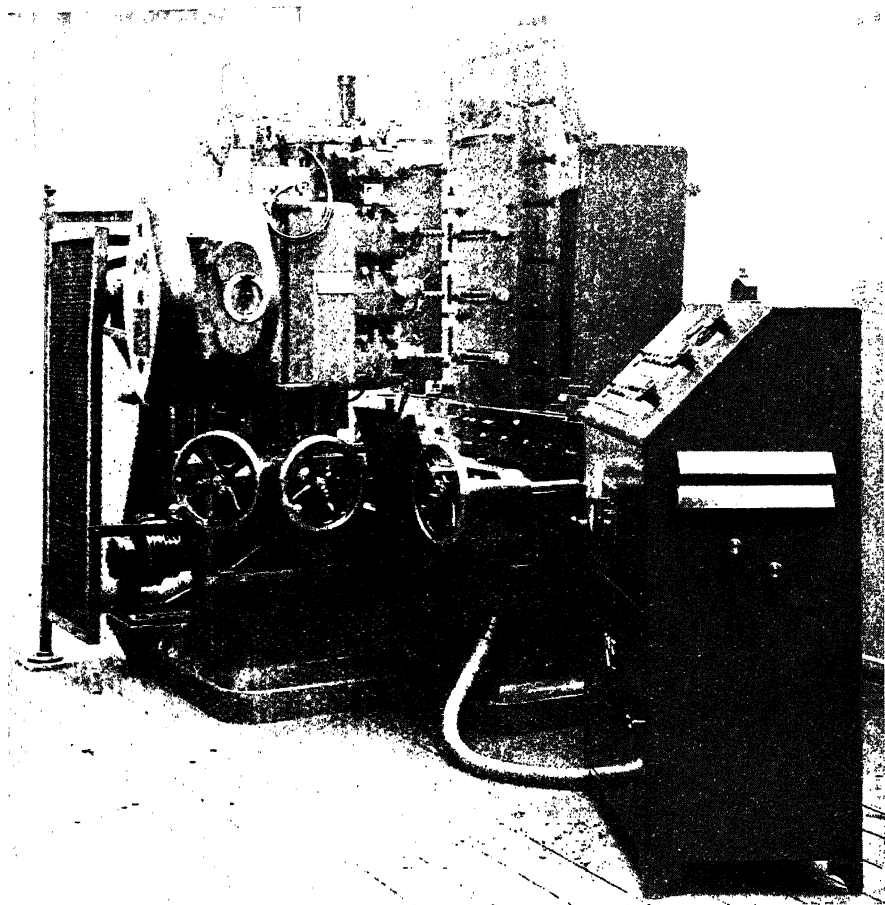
SIMULTANEOUSLY MACHINING THE CONTOUR OF THREE CONNECTING RODS ON A KELLER AUTOMATIC MILLING MACHINE. (*Alfred Herbert Ltd.*)
